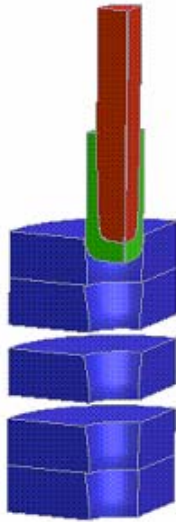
3D CAD model of the prepared piece and the drawing tool
